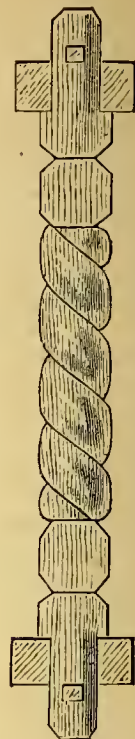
HANDLE OF COAL-SCUTTLE.
